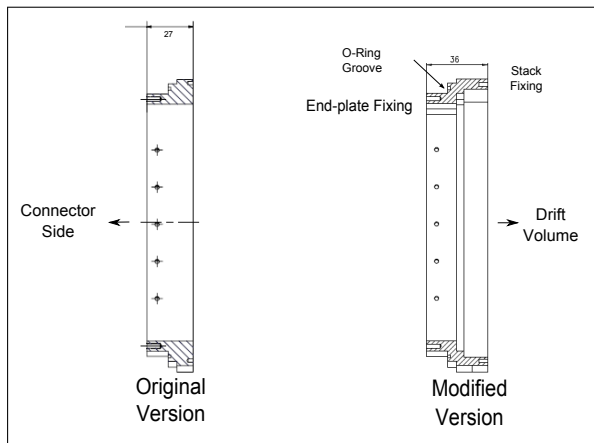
Comparison of the original design of the back-frame used for the dummy modules of the LP-TPC with the modified version used for the *GridGEM module*. Some material was removed from the drift side of the back-frame, where the readout PCB is going to be glued, thus increasing the space available for the electronics component to be mounted on the connector side of that board
